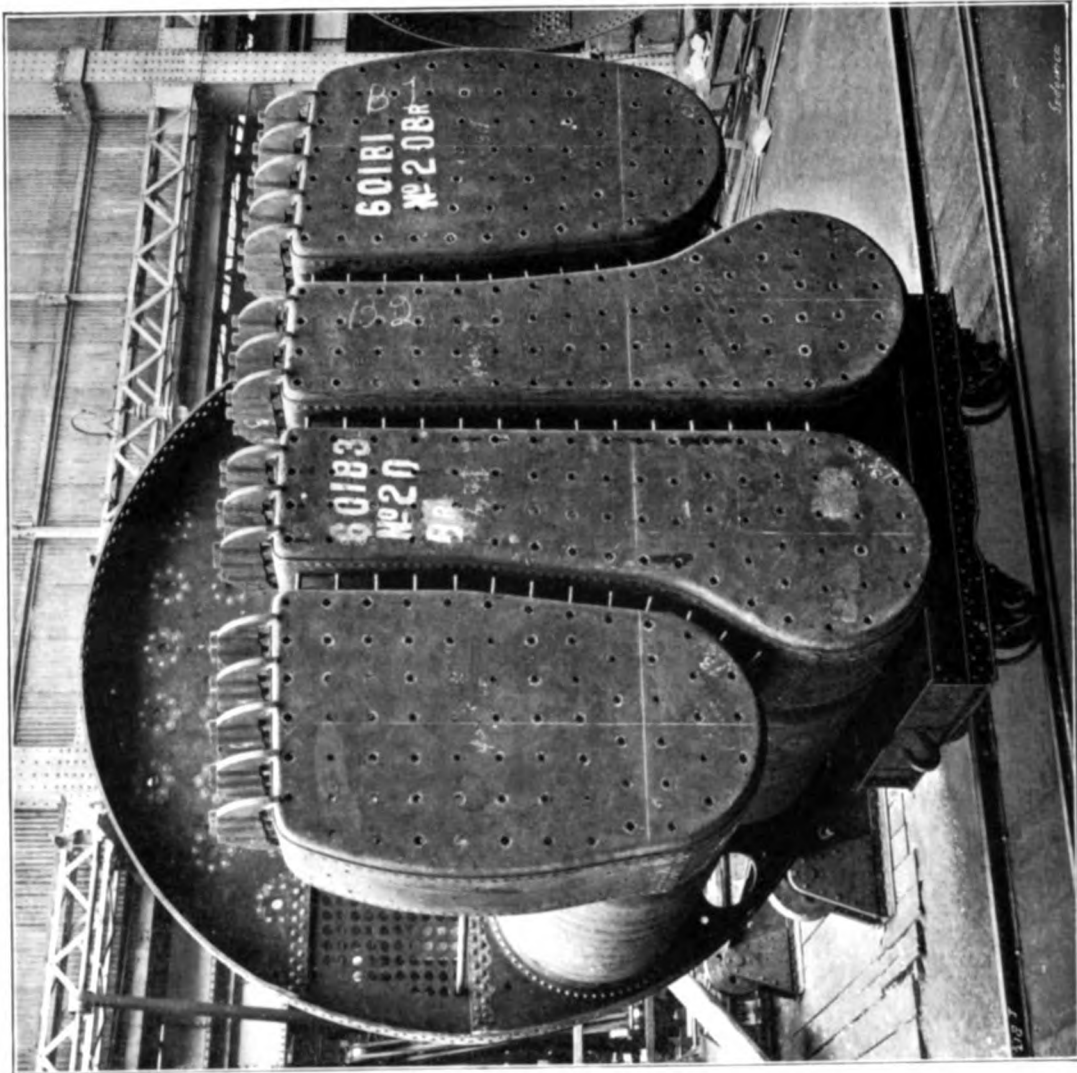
REAR VIEW OF FIRE-BOXES, FURNACES, AND BOILER FRONT.
